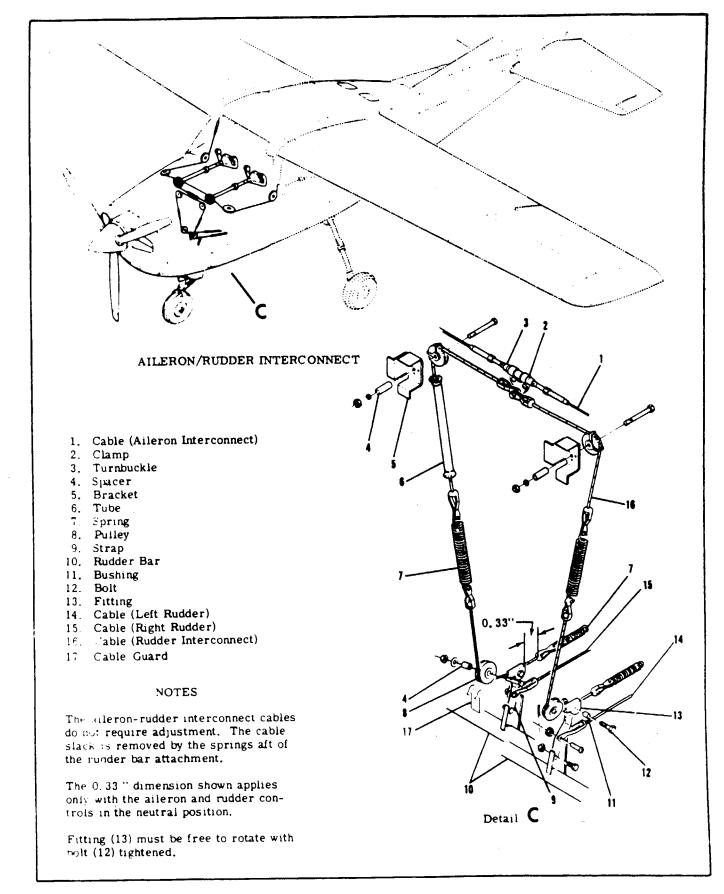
Control Column Installation (Sheet 5 of 5)
